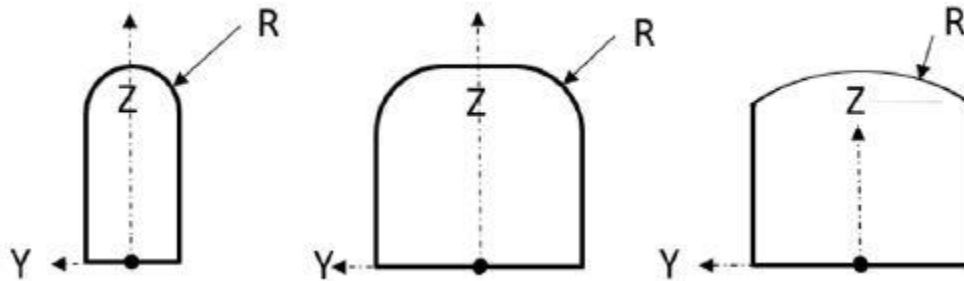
ROOF RAIL SHAPES WITH ROUNDED SURFACE
